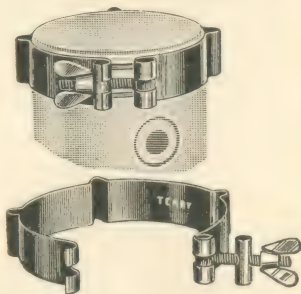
THE TERRY PISTON RING COMPRESSOR
